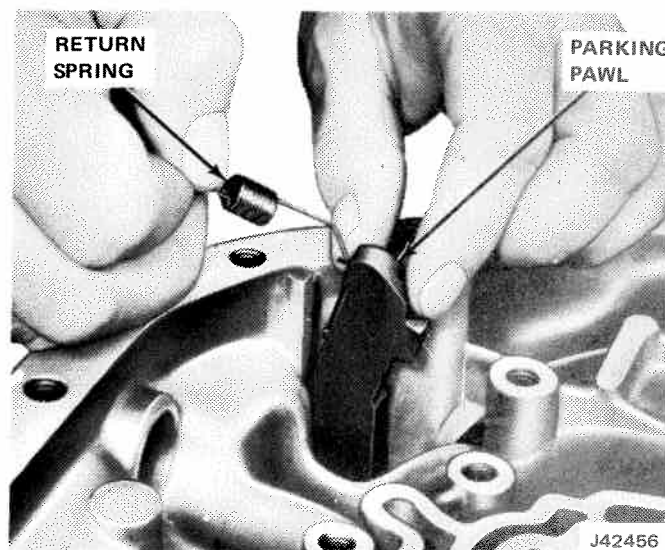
Removing-Installing Return Spring From Parking Brake Pawl
